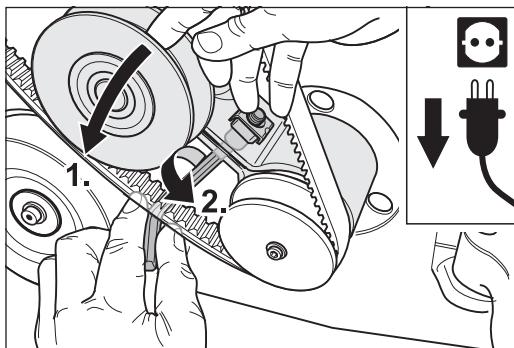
By turning the tensioner, tighten the smaller V-belt (1.) and carefully tighten the clamping screw (2.).
